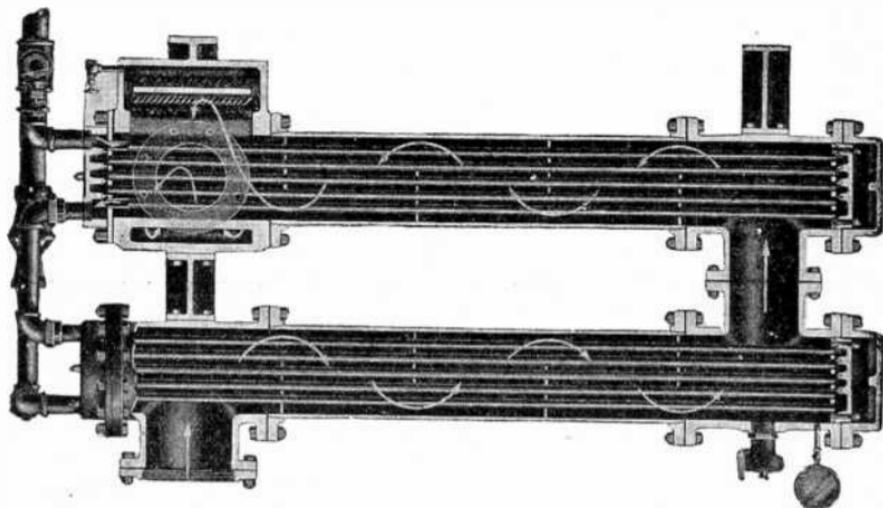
,952.—Ingersoll-Rand horizontal after cooler. The arrows show the course of the air or gas. The moisture separator is in the base below the right hand end of the lower tube nest.
